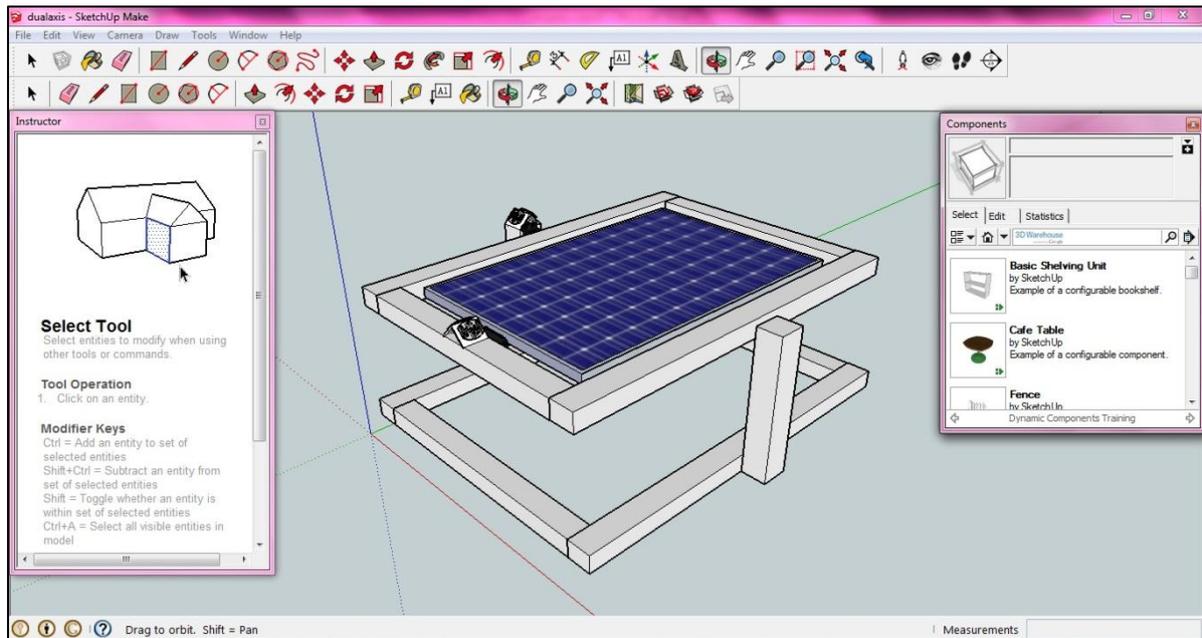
Mounting and Tracker 3D Drawing Design using Sketch Up software
